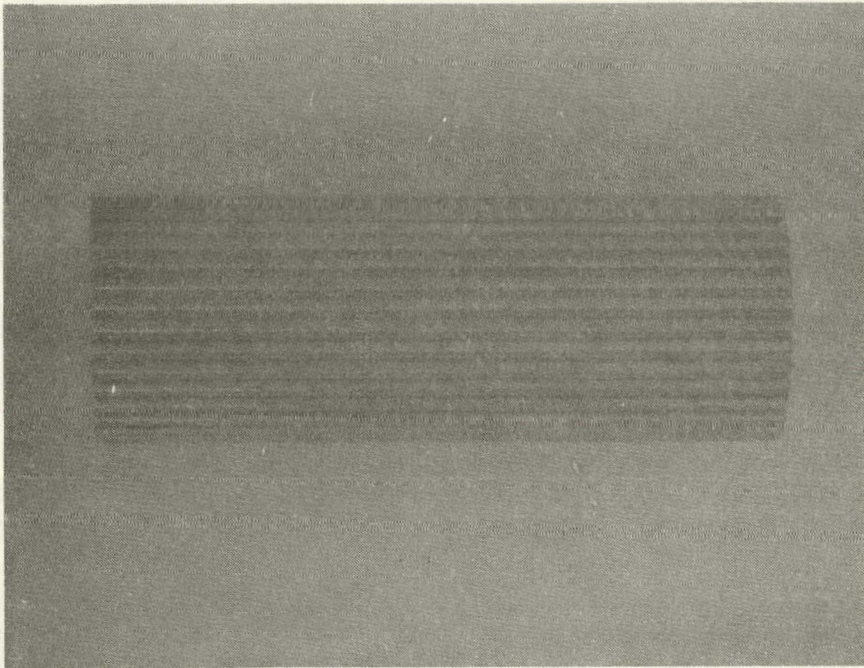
Figure C. View of 5052-0 Tube Formed by Isostatic Pressing at 60,000 psi (Mag. 1-1/4x)
